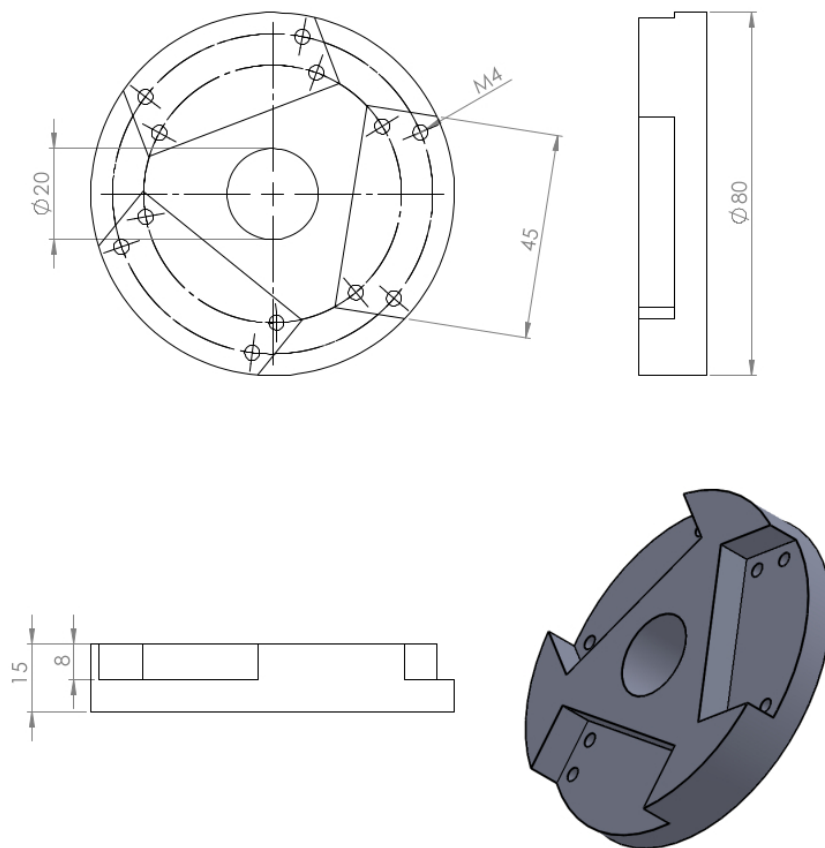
Detailed drawing of the piece that connected spokes and shaft, set up that was used for part of the experiments.
